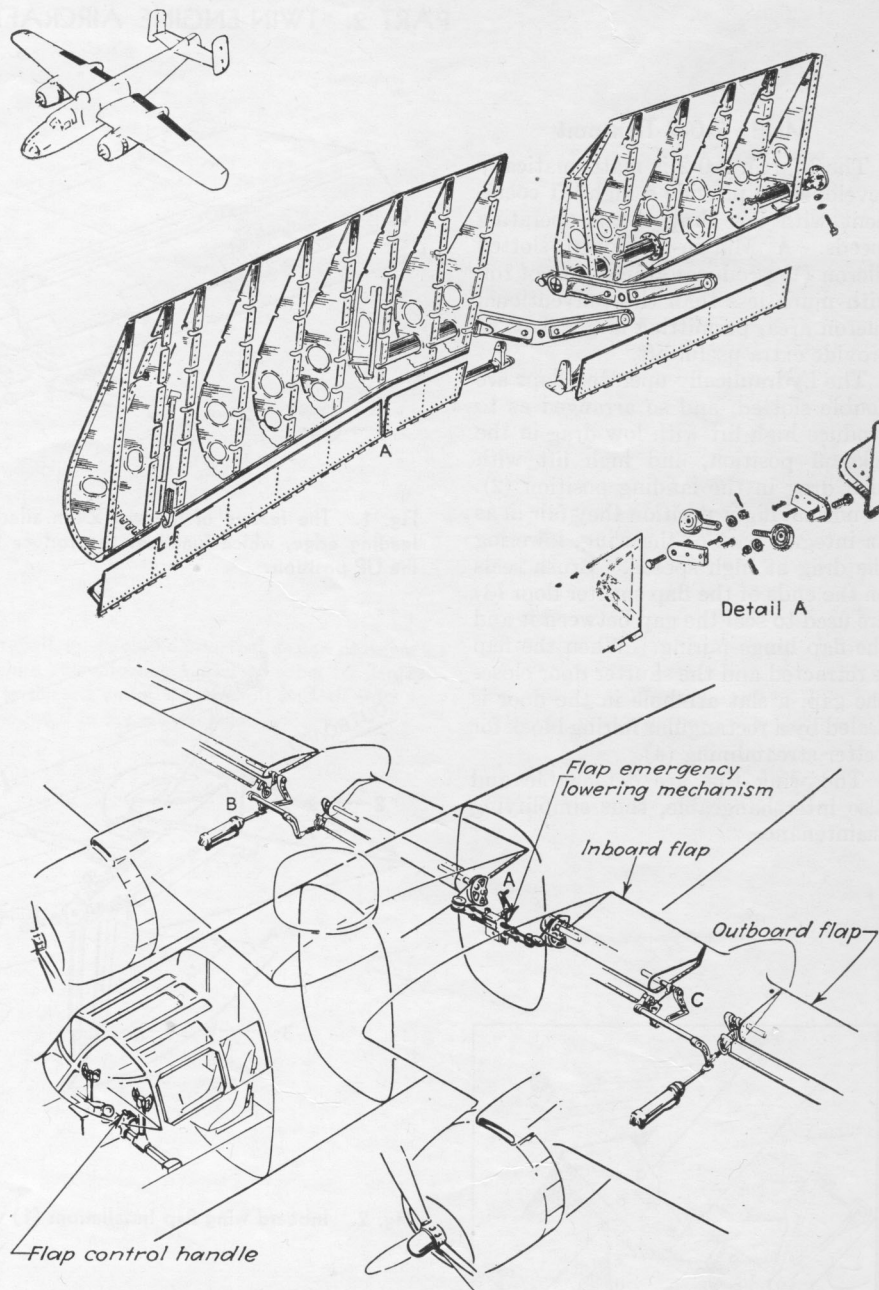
Structural details of outboard and inboard wing flaps. Detail A shows features of the fairing door assembly.
